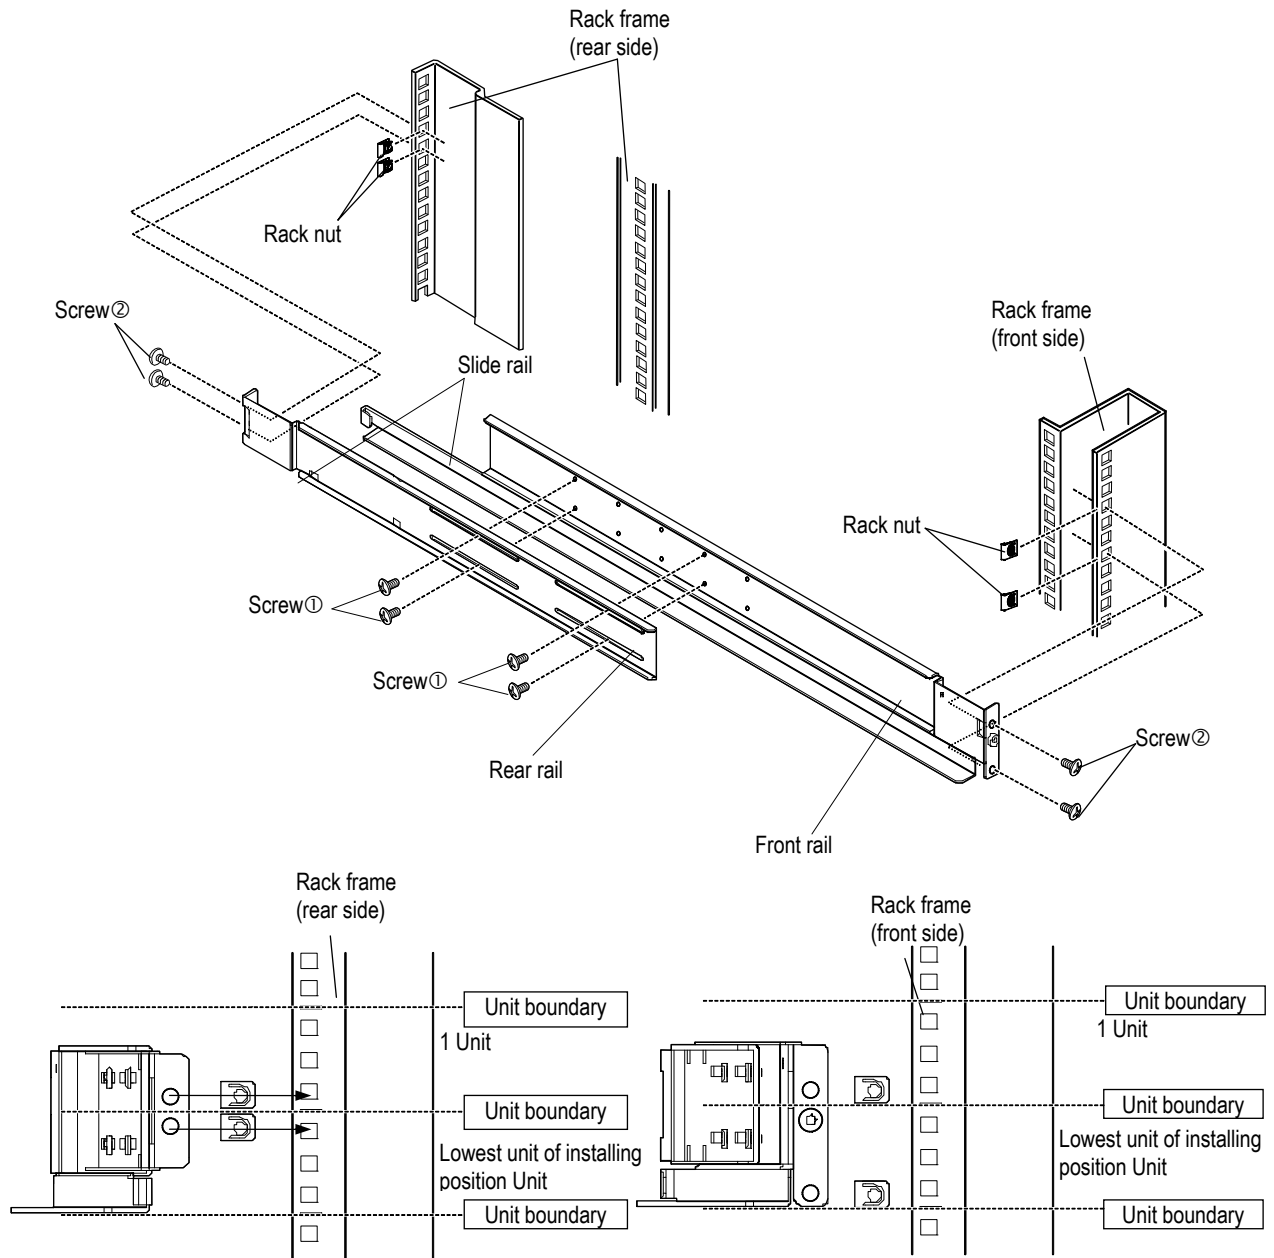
Installing Rack Rails (Square Hole) for Drive Box (DBF)
